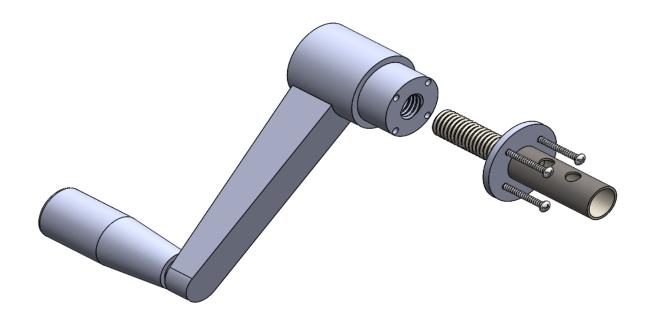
Custom Lock for Arbor Shaft and Crank Handle
